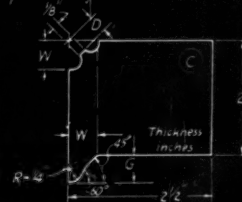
Designers use from 20 to 30 standard welds such as this. Time required is for uninterrupted operation. Gage is used for inspection.
